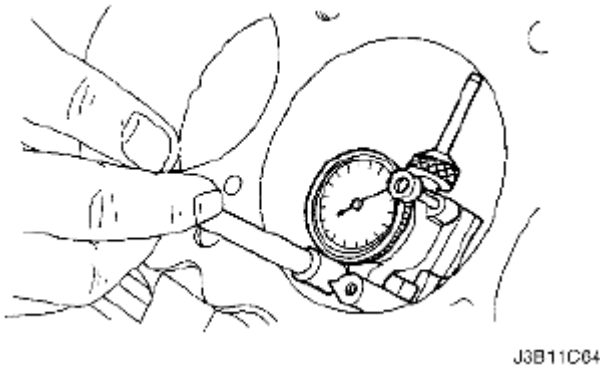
Inspecting Engine Block Cylinder Bore For Glazing
